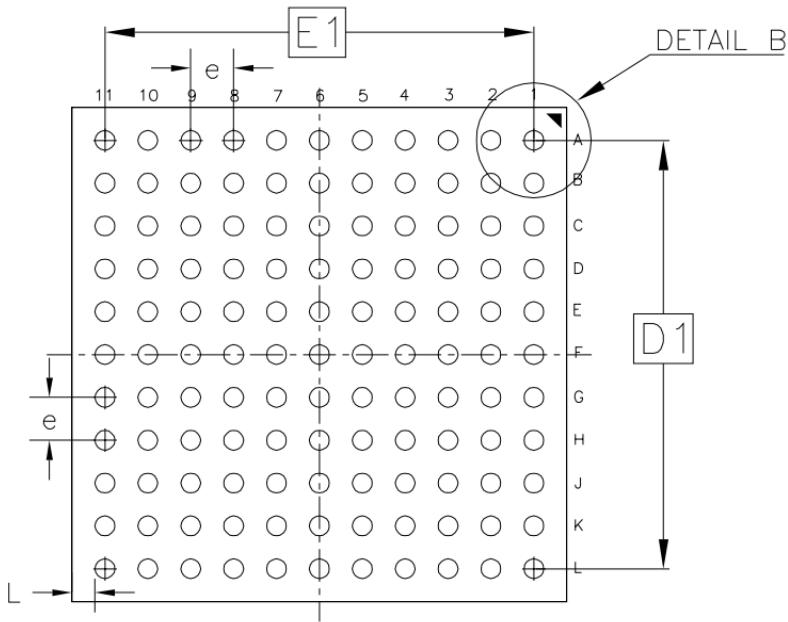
RKNanoD-G LFBGA121 Package BOTTOM View
